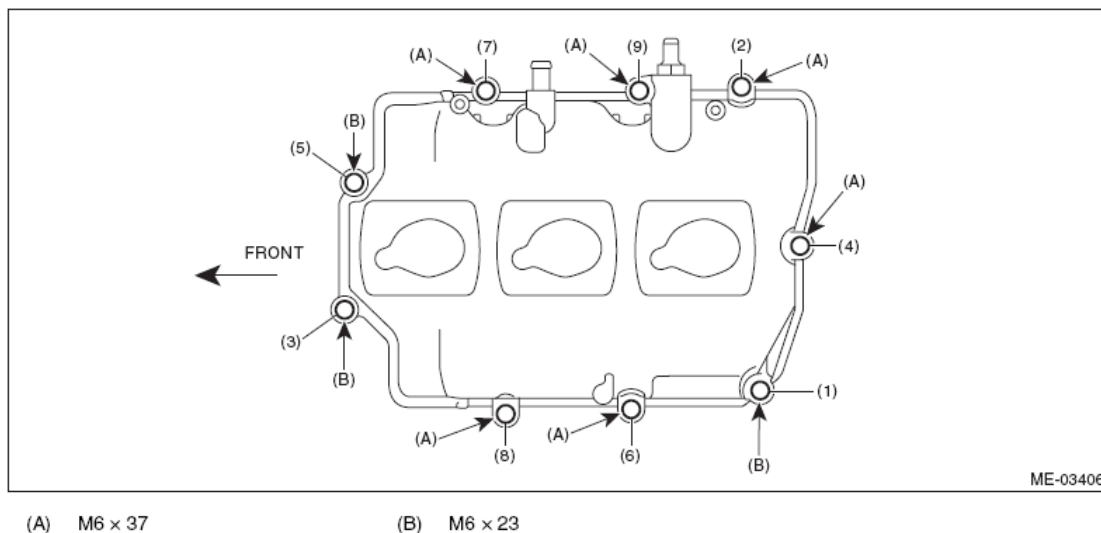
Identifying Rocker Cover Bolts Loosening Sequence - LH Side
